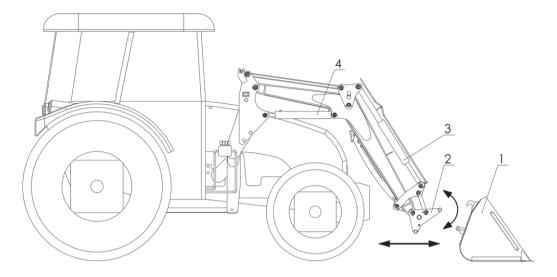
Mechanical tool installation: 1 - work tool, 2 - coupling frame, 3 - arm cylinder, 4 - boom cylinder
